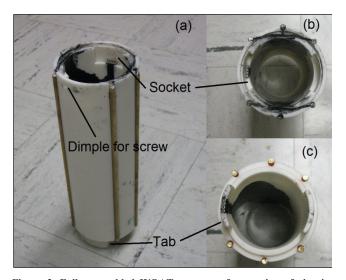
Fully assembled WOAT segment after potting of circuits with black epoxy resin potting compound: (a) side view; (b) bottom view; (c) top view.
